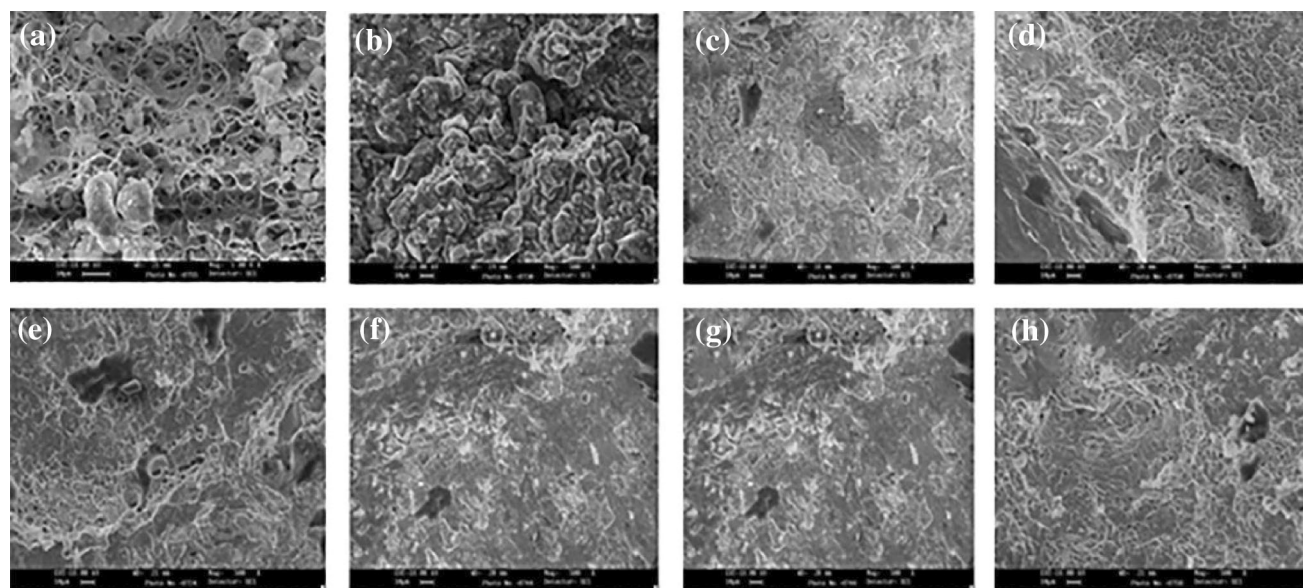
Weld samples fracture section of tensile test samples for the nickel-base alloy side for the laser power of 400 W and welding speed of 200 mm/min at the center of the workpiece at focal lengths of (a) 0 mm, (b) 3 mm, (c) 4 mm, and (d) 6 mm, and for DSS side for (e) 0 mm, (f) 3 mm, (g) 4 mm, and (h) 6 mm.
